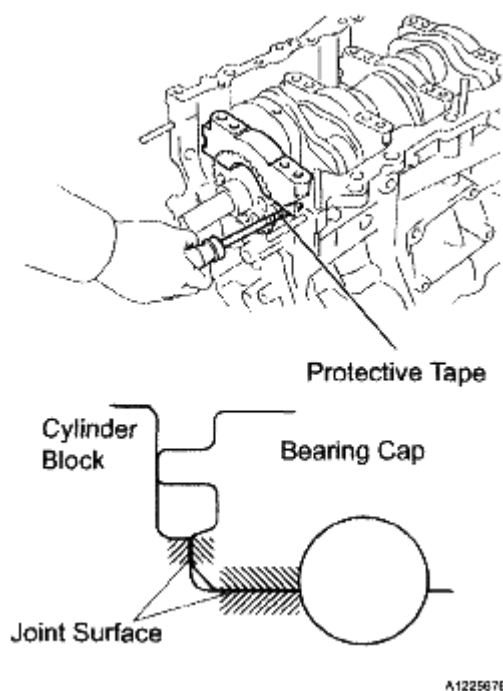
Removing Main Bearing Caps & Lower Bearings
